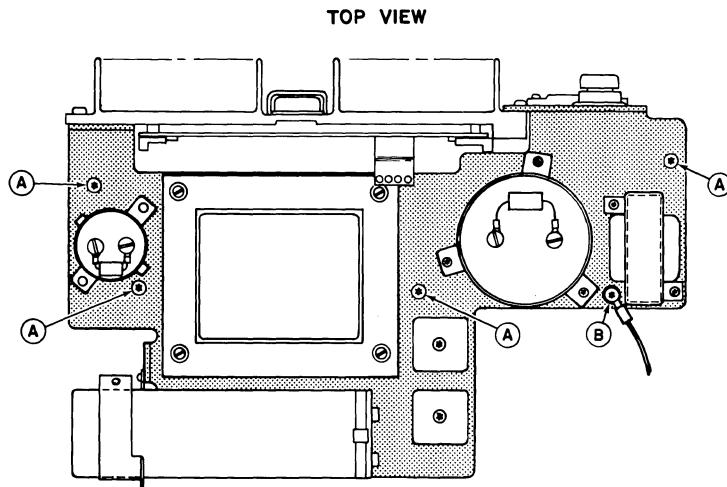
POWER SUPPLY ASSEMBLY MOUNTING SCREWS
